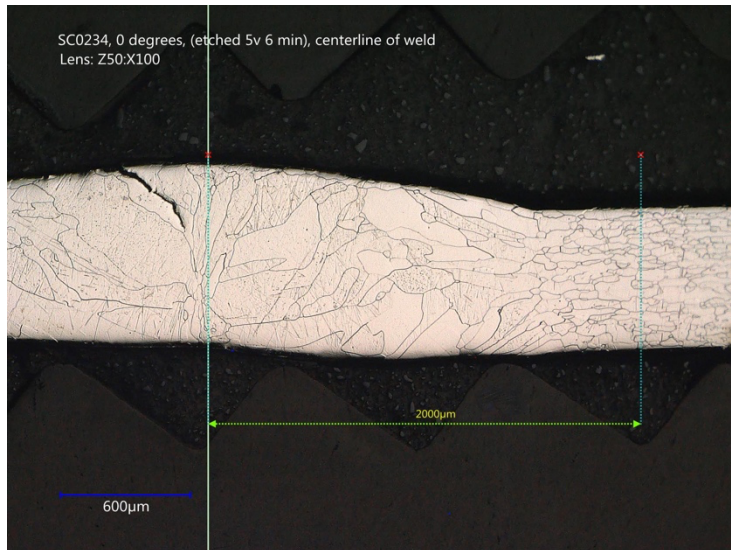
Weld cross section at 0 degrees showing evidence of crack
